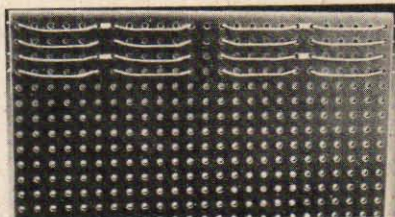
Plain s.r.b.p. with the connecting wire hooked through the end holes in the rows
